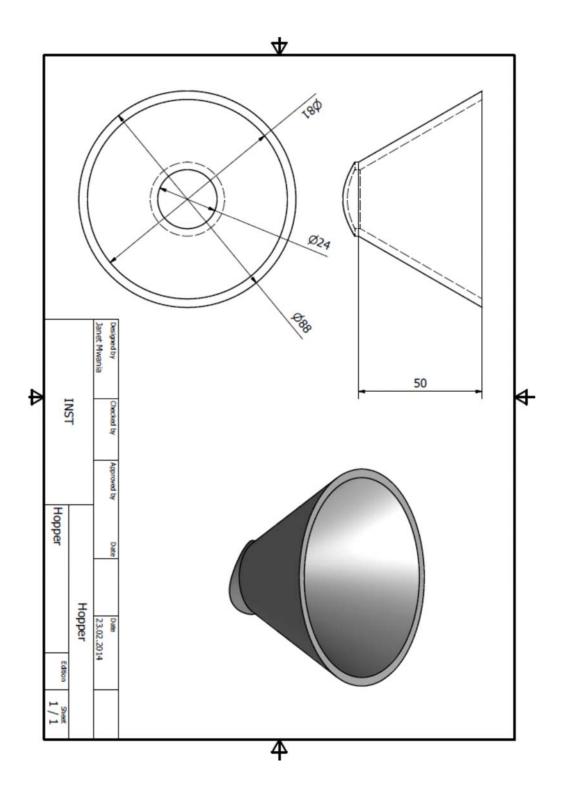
3D image of the hopper with End and Plan elevations detailing dimensions
